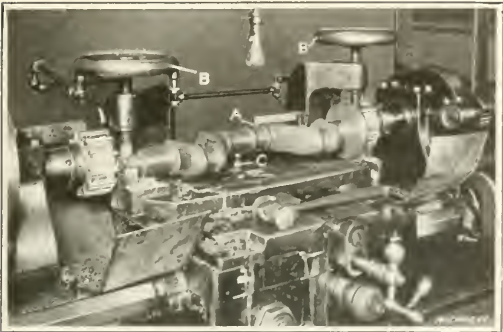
Greaves-Klusman 16-inch Engine Lathe equipped with Locating Gage to enter Center-punch Mark. Two Headstocks and Milling Cutters for cropping Ends of Crankshaft Forgings to reduce them to Standard Length
